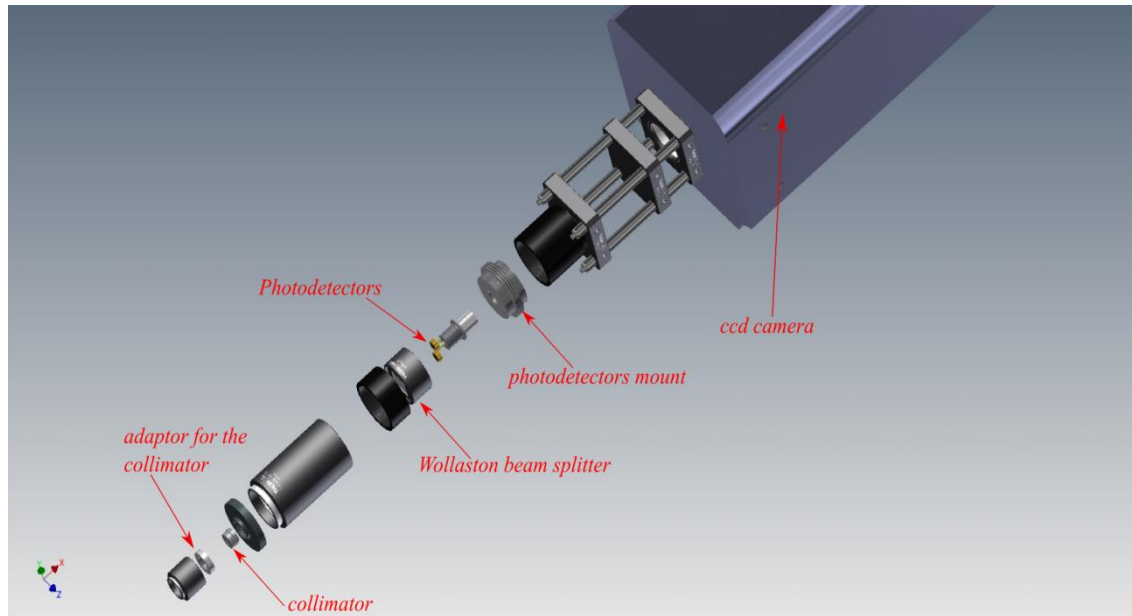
Opto-mechanical design of the detection part. This drawing shows the way that the parts fit together. The labels notice the most important parts of the detection part assembly.
